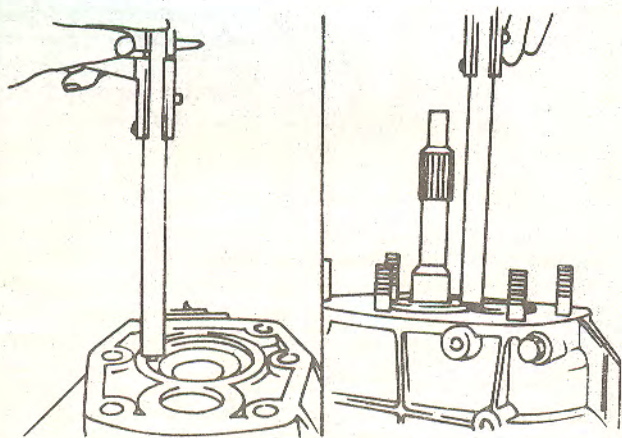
Before installation of the clutch housing, measure the depth of the bearing seat (left-hand illustration) and the protrusion of the bearing (right-hand illustration) to obtain the correct clearance.
